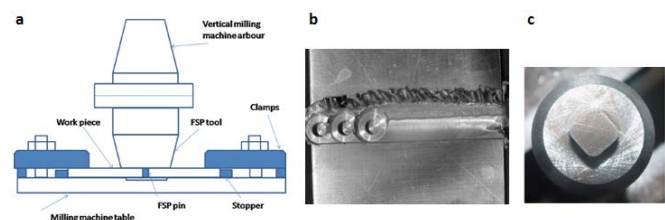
(a) Experimental set-up of FSP on a milling machine; (b) FSP'ed sample using 3 overlapping passes (c) FSP tool photo showing the tool shoulder and the square pin [11].
